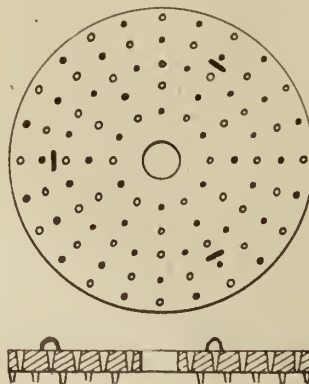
TOP AND CROSS-SECTION VIEW OF PLATE ON WHICH CORE IS BUILT
